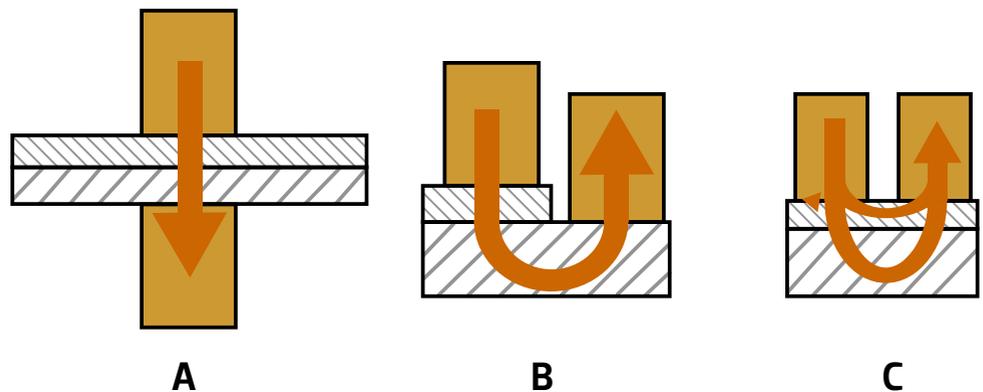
Electrode configurations. Example A is the only type of configuration achievable with the Sunstone WH1 weld head.
